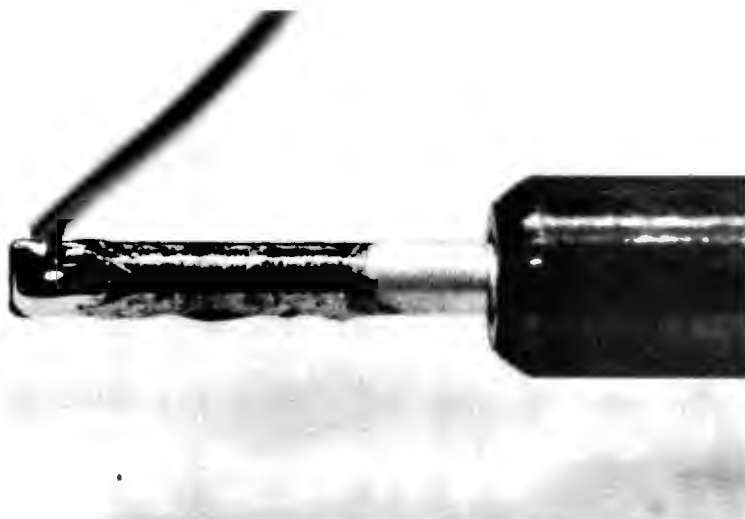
After cleaning the tip of the soldering iron with a wet sponge, prepare it by adding a dab of solder.
